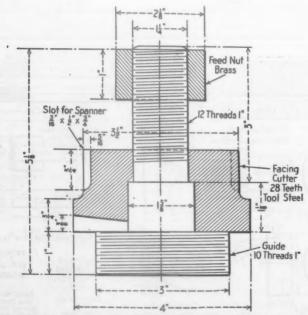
This tool is used for re-seating stuffing box joints in the center casting
